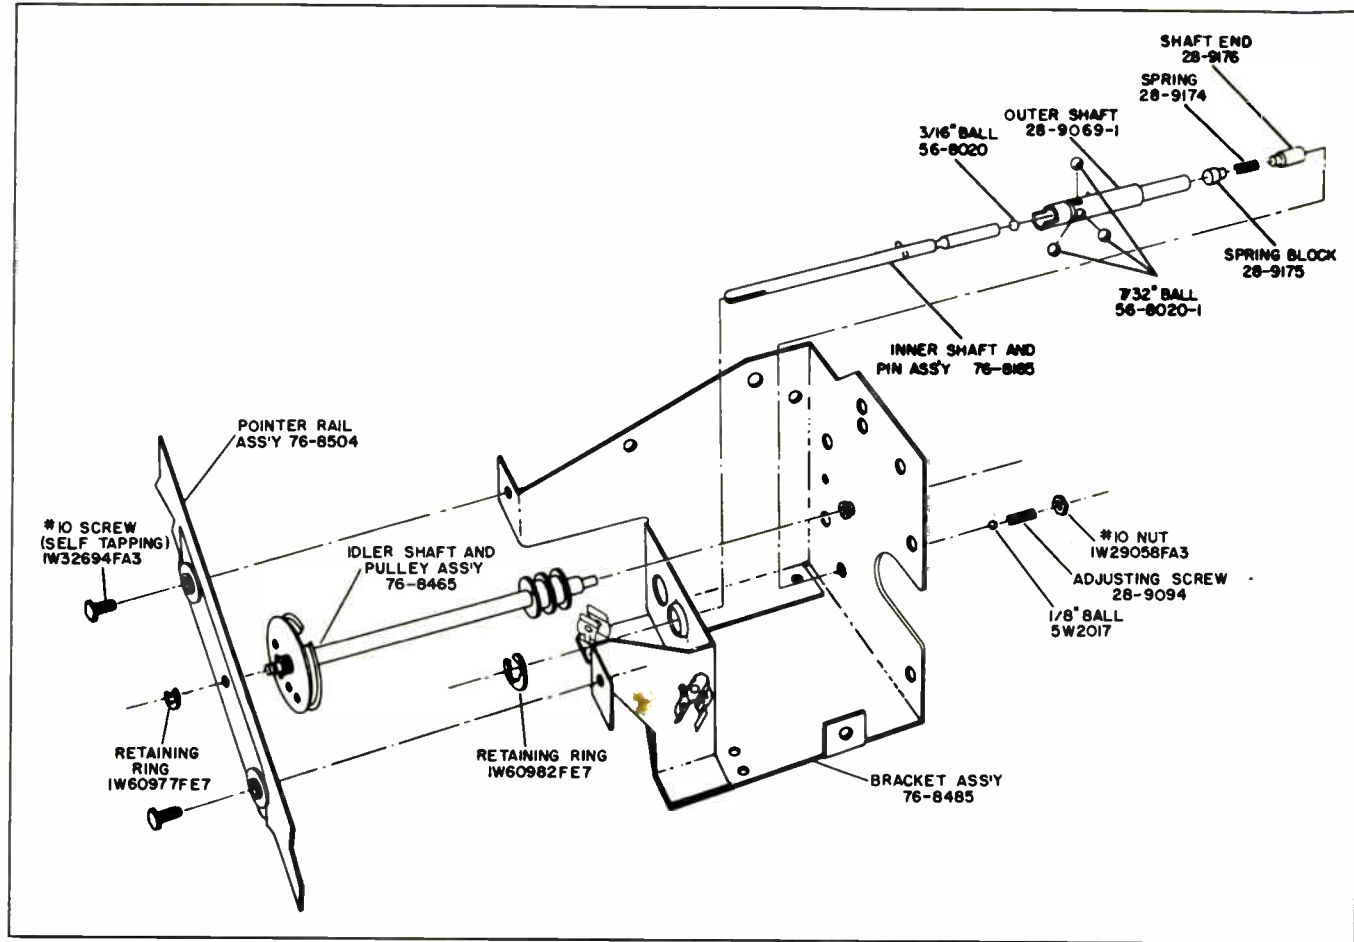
Planetary Assembly, Exploded View, Showing Mechanical Layout
